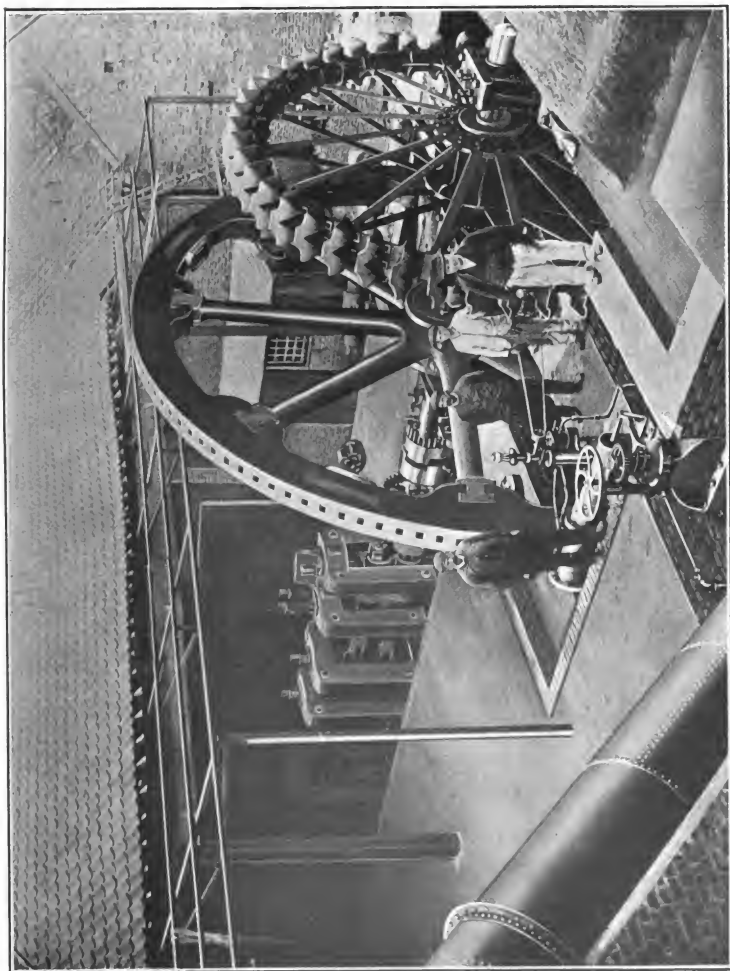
Pelton wheel 21 ft. in diameter driving tin plate rolls.
